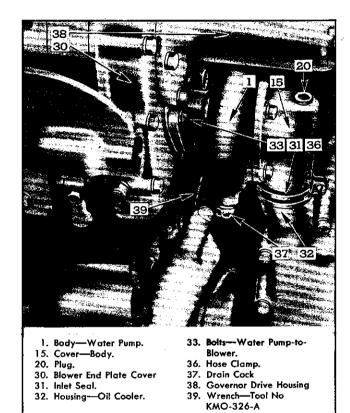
Loosening Inner Bolt from Water Pump Mounting Flange with Tool No. KMO-326-A.
